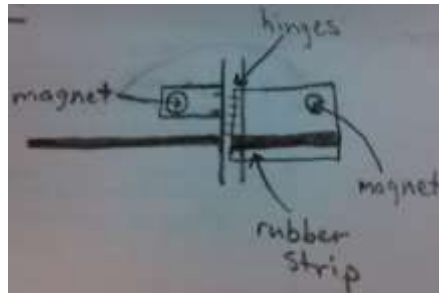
Example of a clip that could hold the foil the bar it is rolling under.
